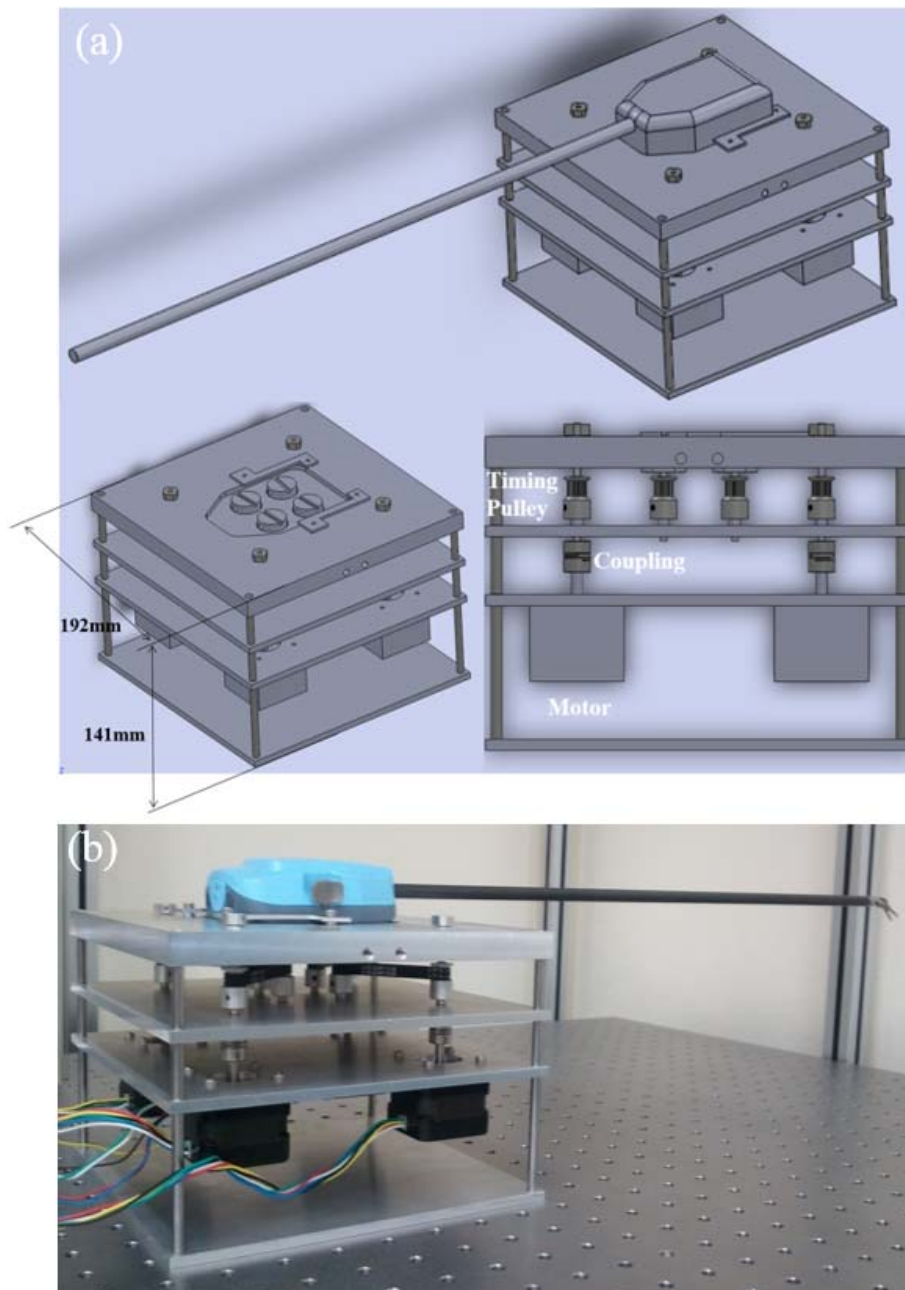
Prototype version 1, KS-1. (a) 3-D design of KS-1. (b) In-house torque transfer mount and EndoWrist were assembled. The EndoWrist was driven by 4 step motors and several mechanical part (bearing, timing pulley, timing belt, coupling, etc.)
